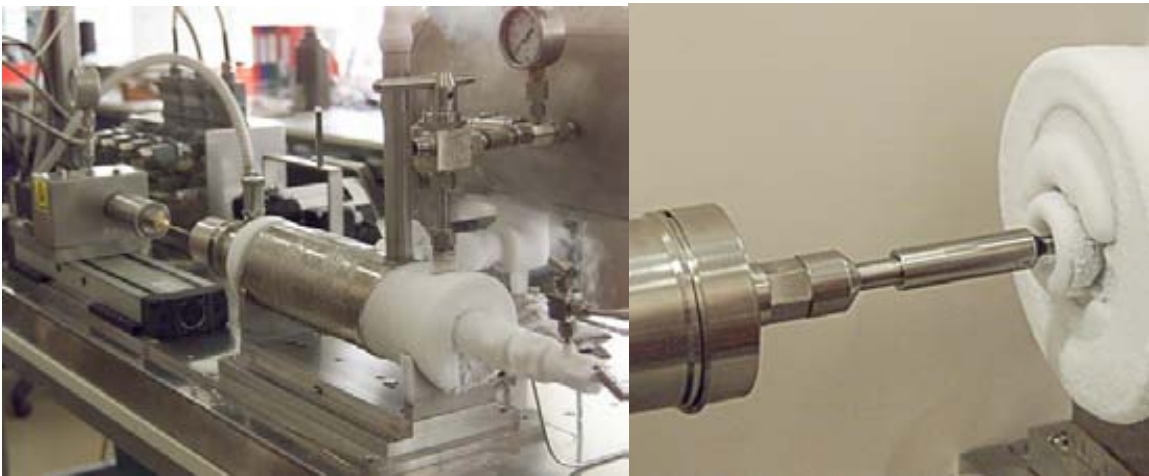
, Re-instrumentation equipment used for drilling of thermocouple holes in pre-irradiated fuel rod segments
